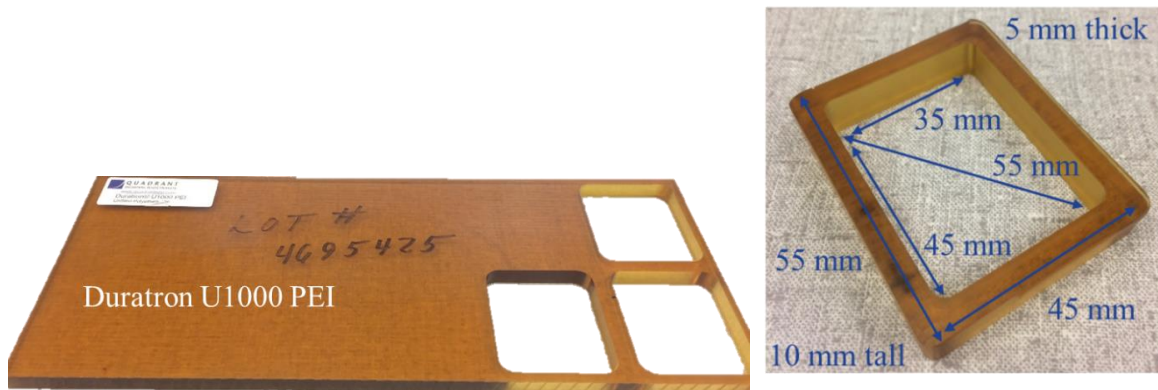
Duratron U1000 PEI material and housing machined by Virginia Tech
